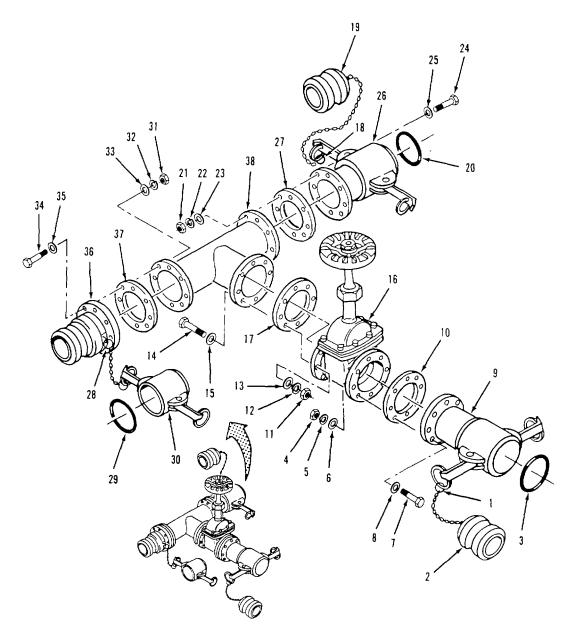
Tee and Gate Valve Assembly (9114-Y6) Assembly.
